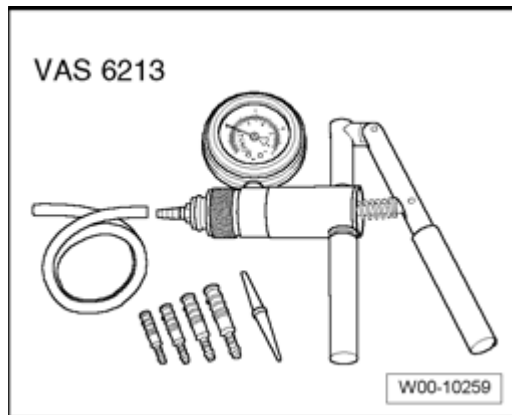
Identifying Hand Vacuum Pump VAS 6213
